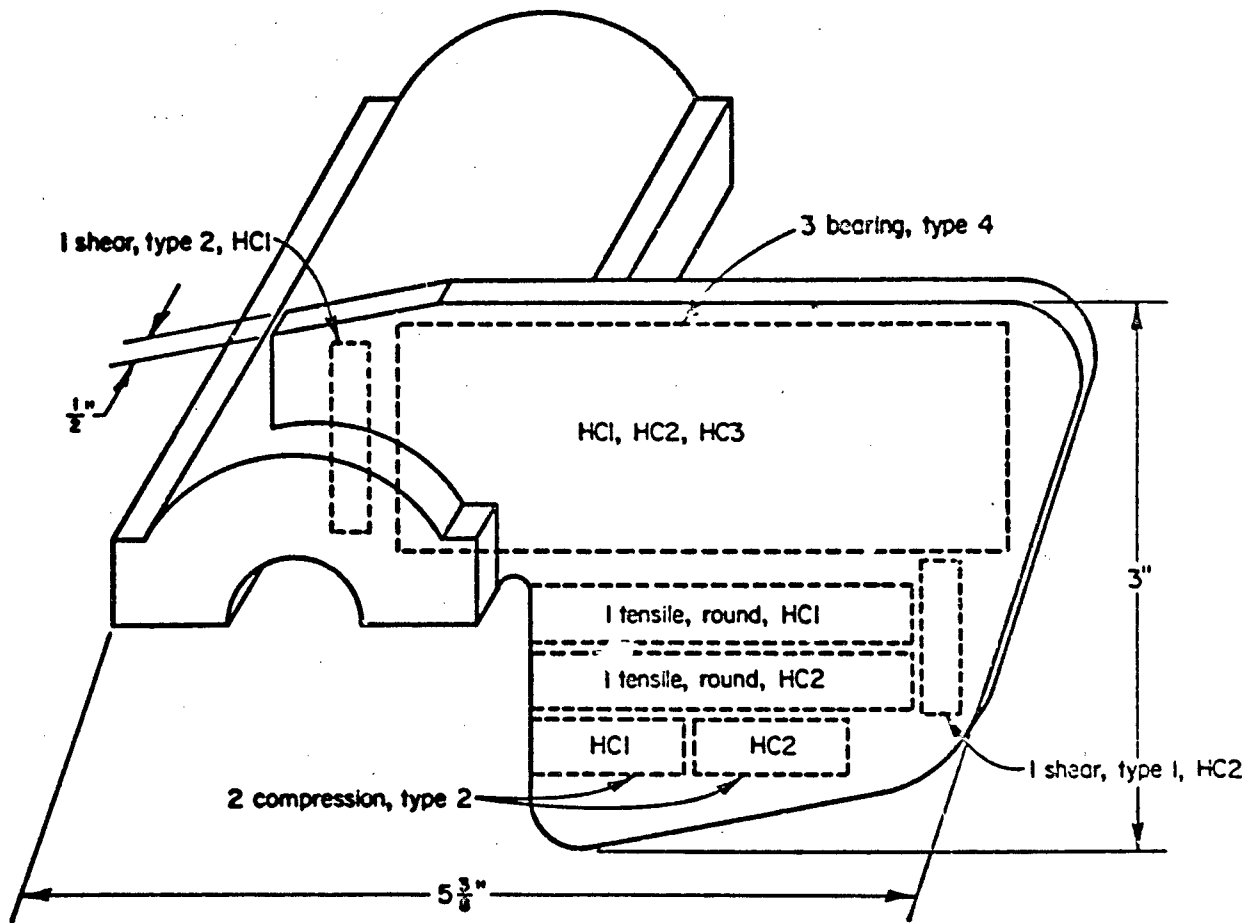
LOCATION OF TEST SPECIMENS FOR CASTING HC
